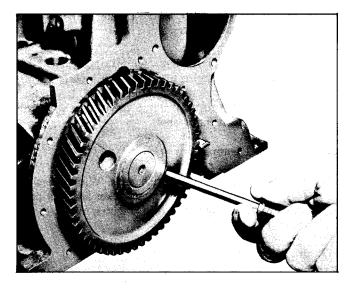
Removing Camshaft Thrust Plate Screws
